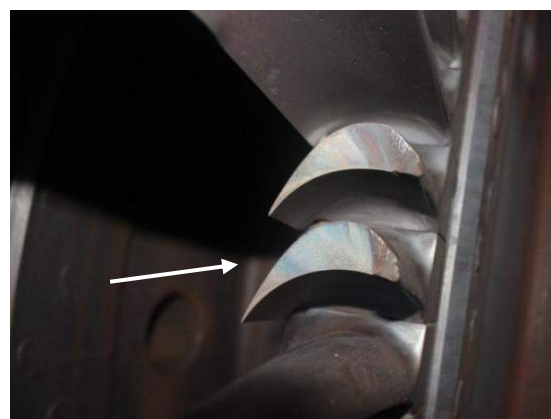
Brittle failure of 22 stage blades of T-100 /120-130 medium-pressure rotor
